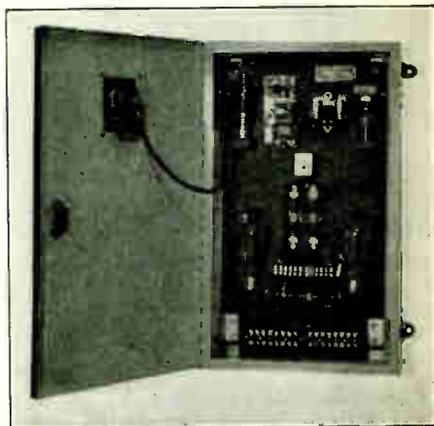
A timing control for spot welding, showing the thyatron tubes.
